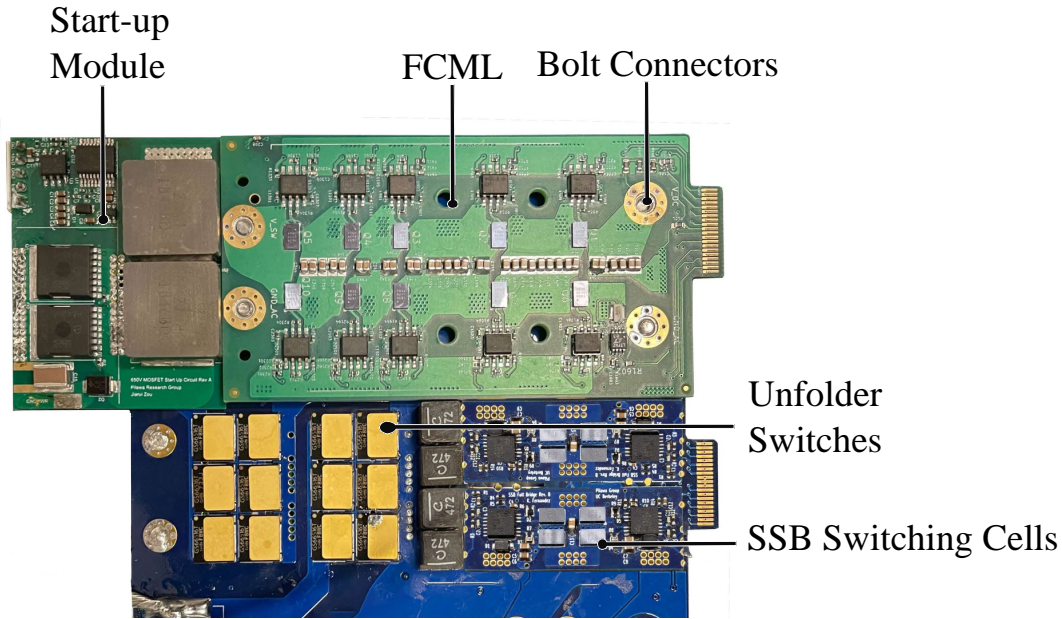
Assembly of the EV charger system showing the SSB switching cells, which are mounted on to the SSB/Unfolder board depicted in Fig. 3.6, and the start-up PCB daughter-board, which is mounted on to the FCML converter PCB. (Figure created in collaboration with Ting Ge, Rahul Iyer, and Jiarui Zou.)
